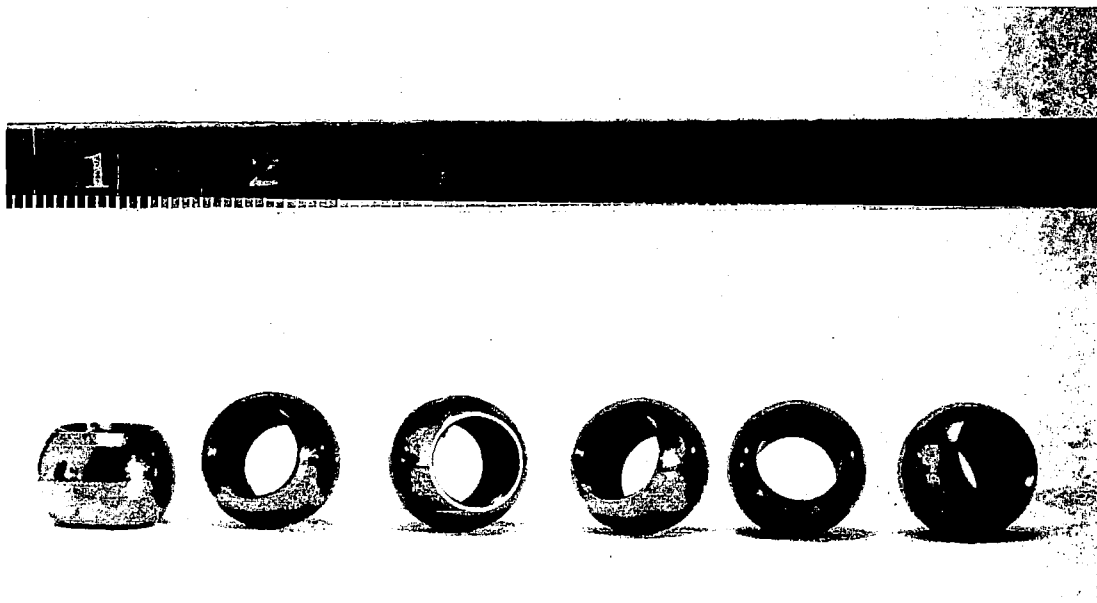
Appearance of Typical Drilled Balls With Oil-Sludge Coating on Bore Surface — Bearing S/N 2552A-1
